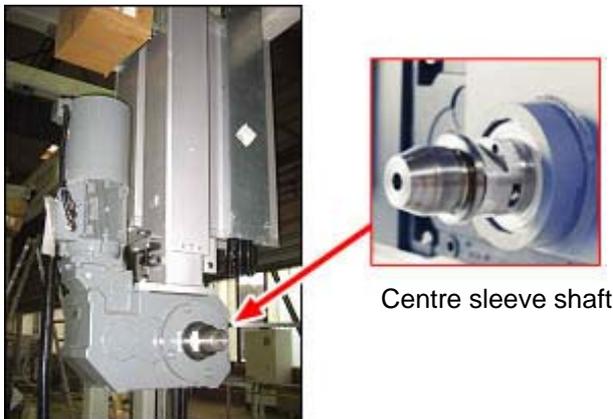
Winder drive unit KK 136A 161L4 BR150 IG FLTH
